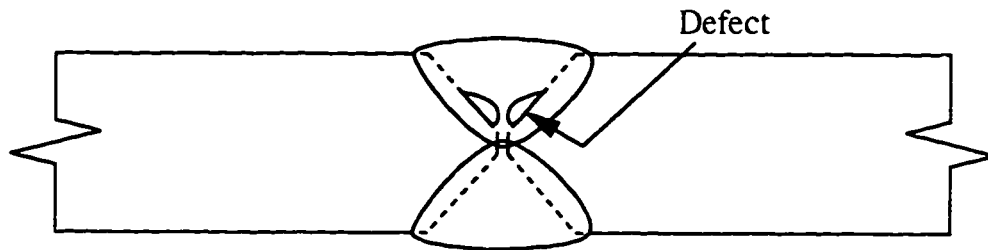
Butt weld lack of fusion defect. In this defect, the weld metal is flowed onto the base metal, instead of mixing with it.
